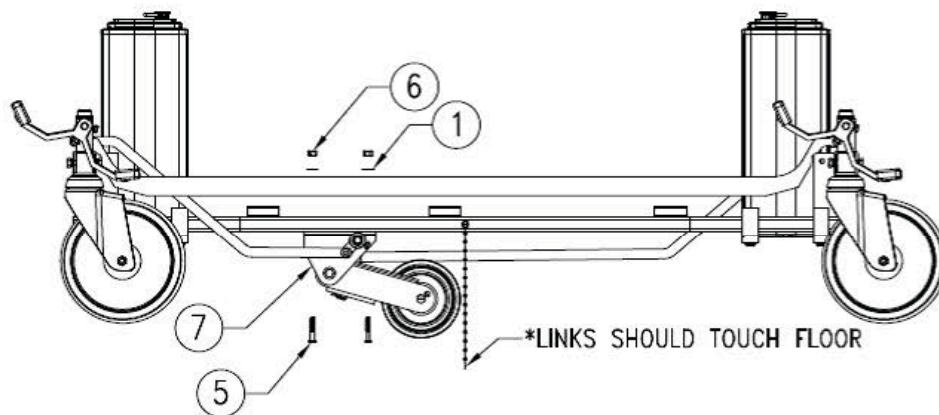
FIFTH WHEEL SUB-ASSEMBLY,
